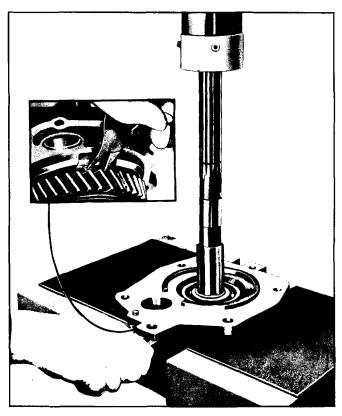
D-24 Pressing Mainshaft from Rear Bearing Retainer
